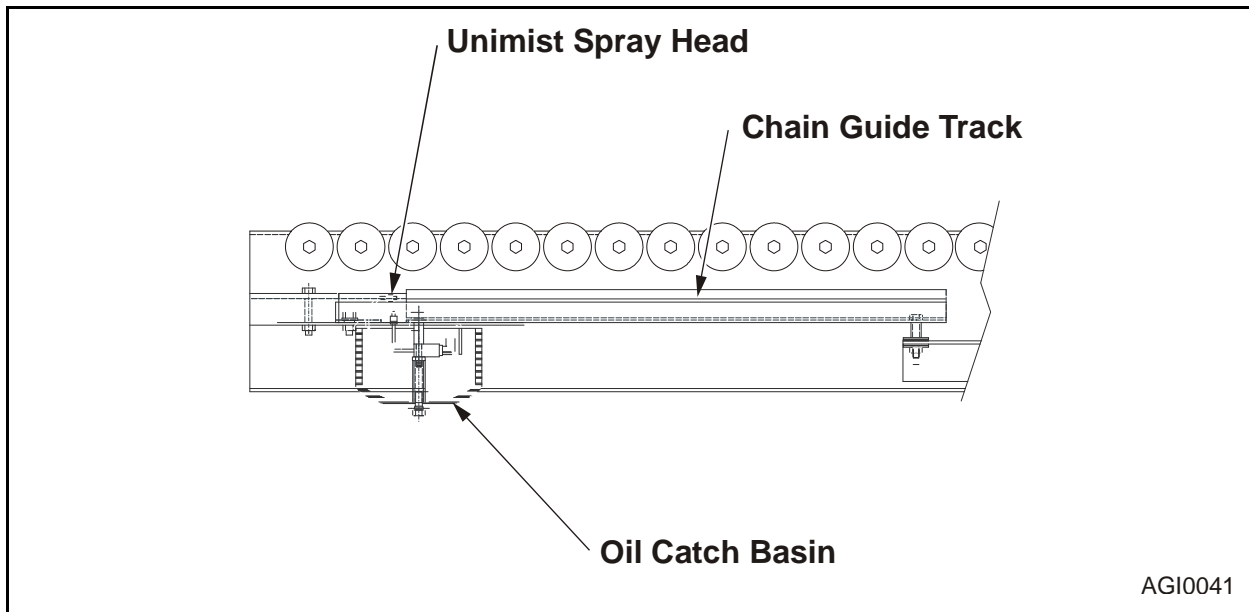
27 Chain Track Lubricator - Solenoid-Controlled
